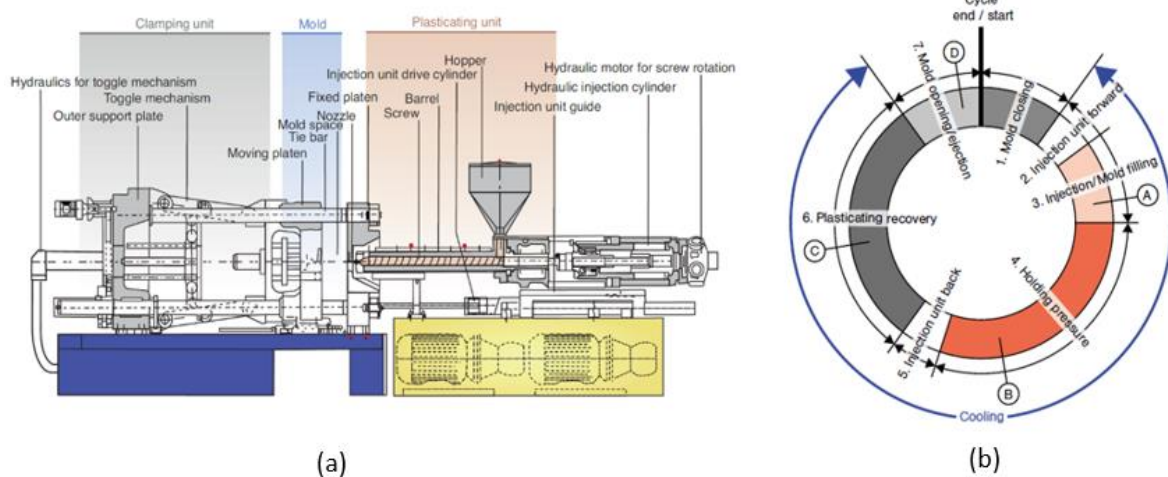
An injection moulding machine used to manufacture typical polymer materials in Figure (a) and an injection moulding cycle in Figure (b) (Gandhi et al., 2020).
